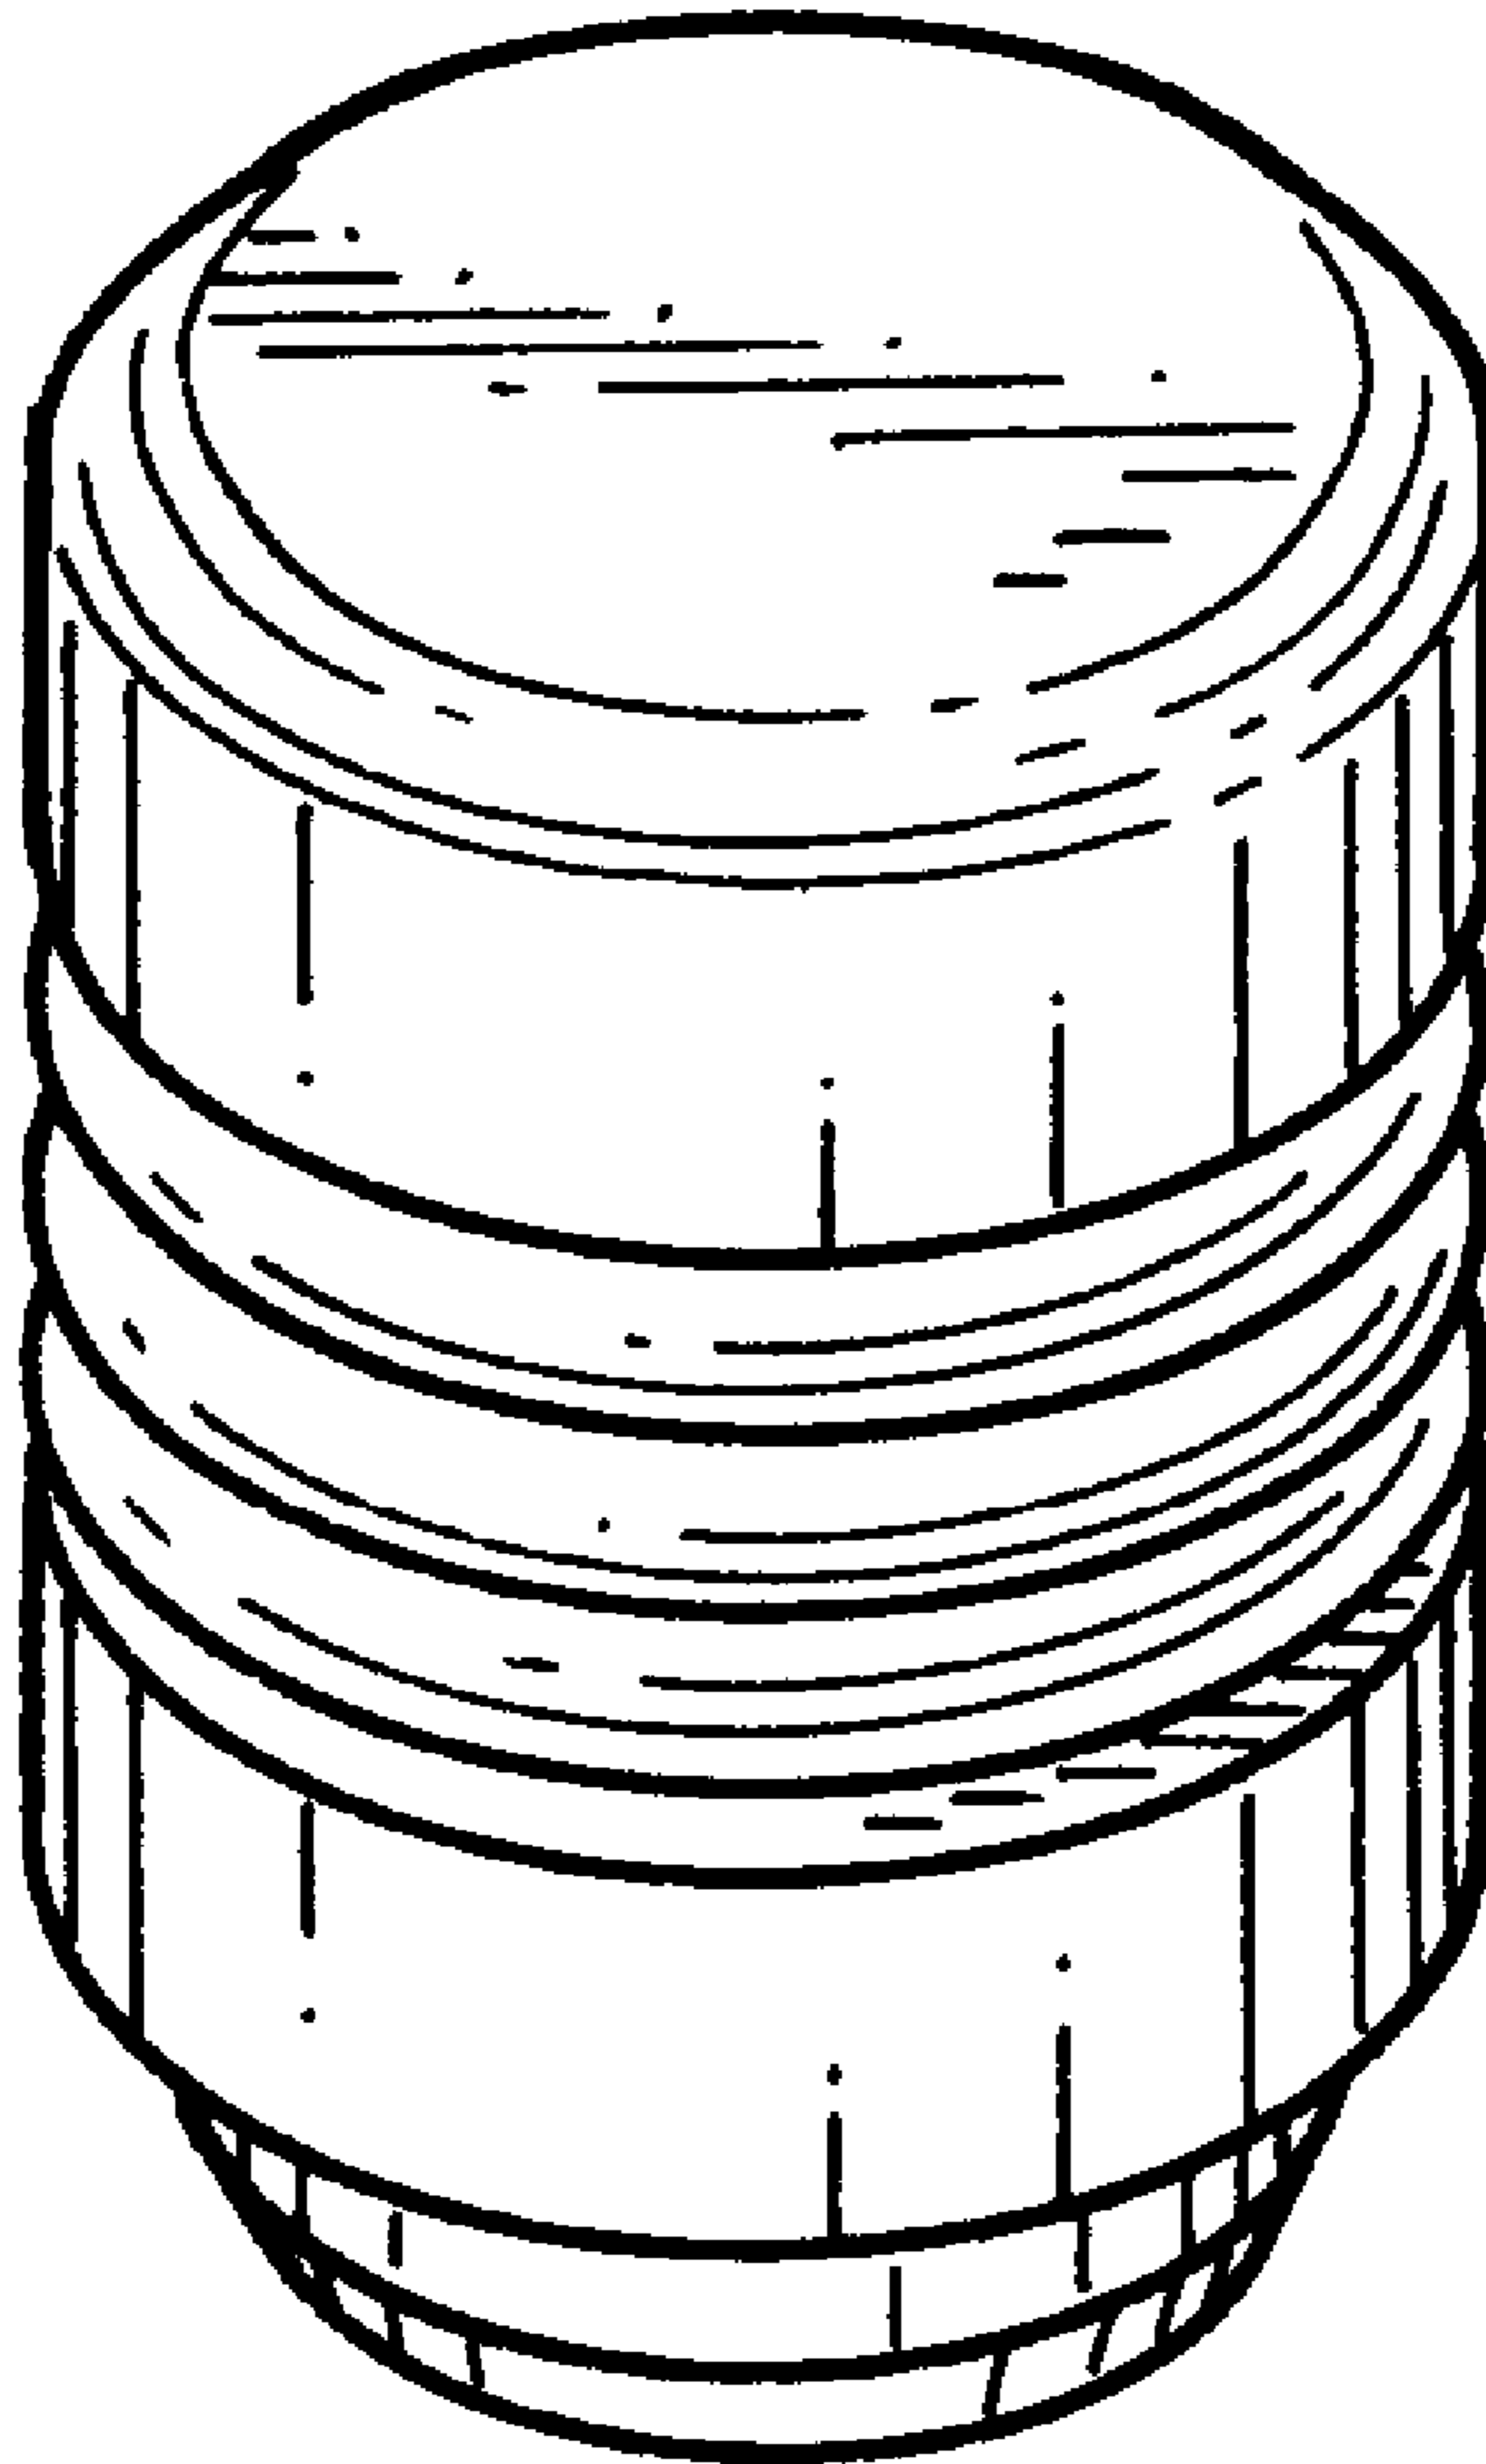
is a perspective view of a tire valve cap showing my new design;
